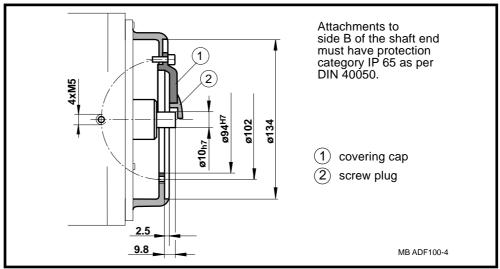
Main spindle motor ADF 100 - side B shaft end or shaft extension
